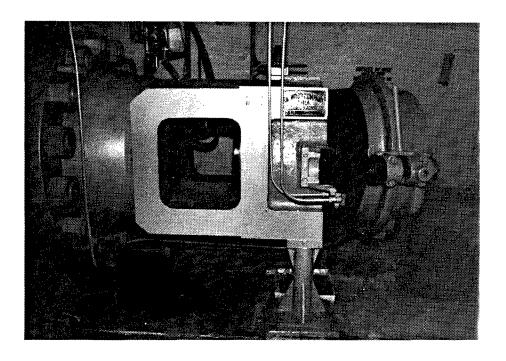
Building 6810-09: Farquar horizontal oil hydraulic extrusion press with extrusion dye and holder.
